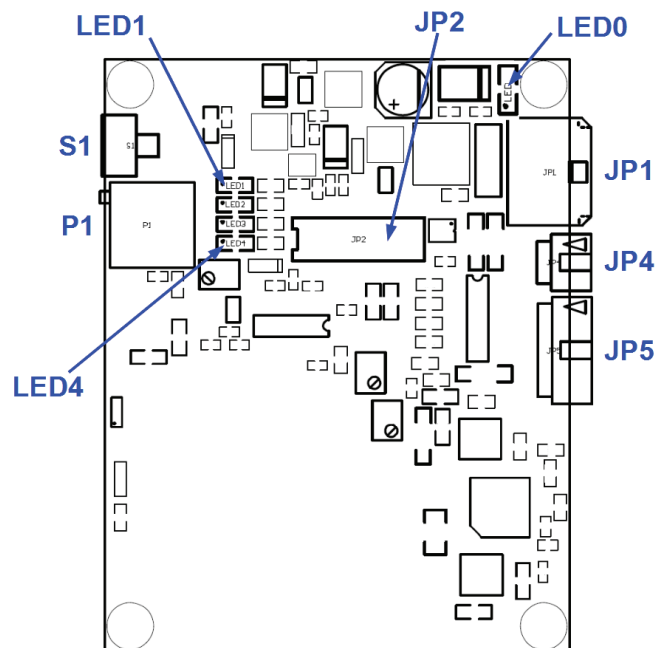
Schematic top view of the EBD5000 indicating the user interfaces
